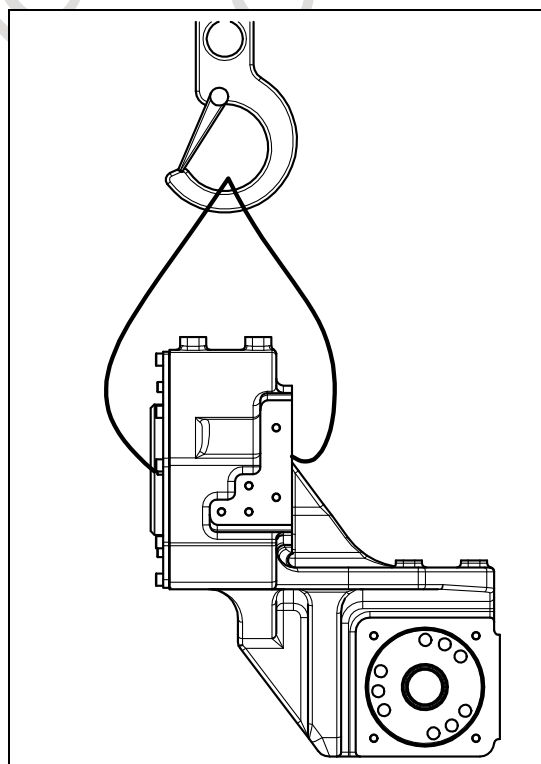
(c) Replacing the J4-axis gearbox unit
